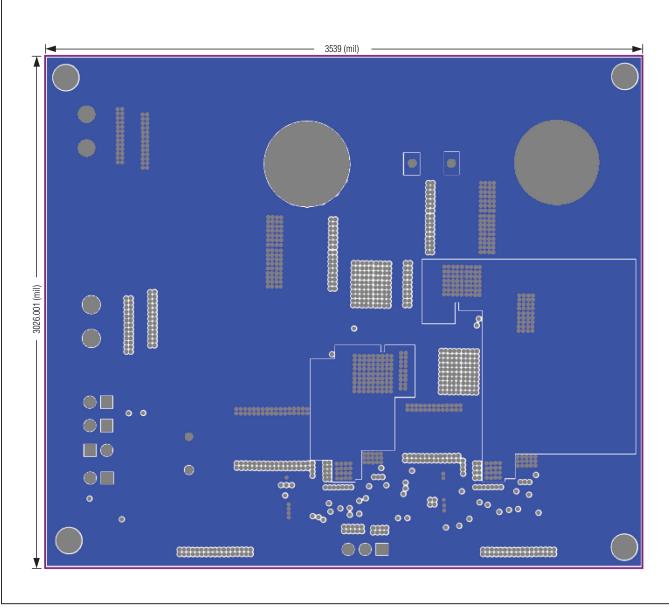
MAX8686 EV Kit PCB Layout—Bottom Layer (PGND and LX)
